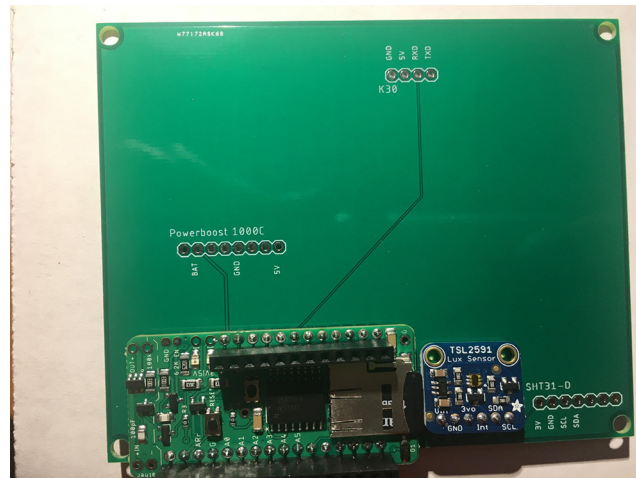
Top view after soldering the Lux Sensor to the PCB.
